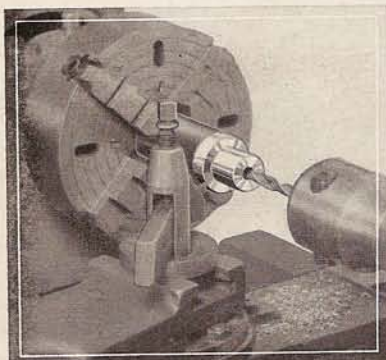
Boring a Bushing in the Chuck on a No. 22—9-inch Junior Lathe
